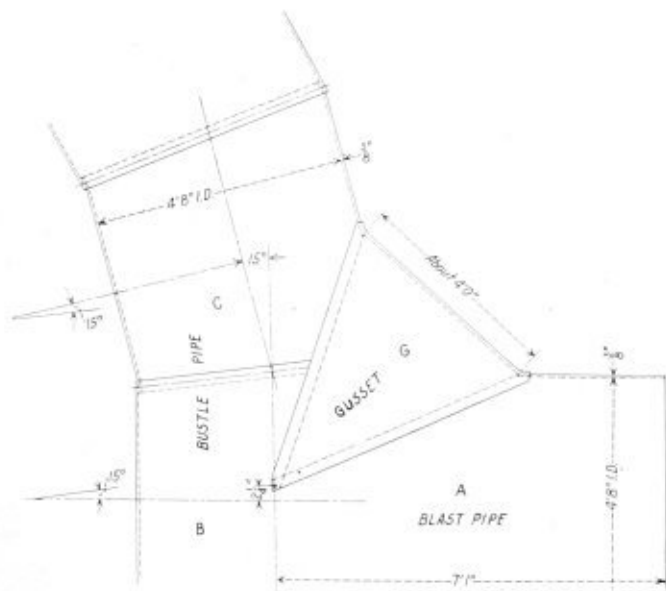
Gusset Connecting Blast Pipe to Bustle Pipe
